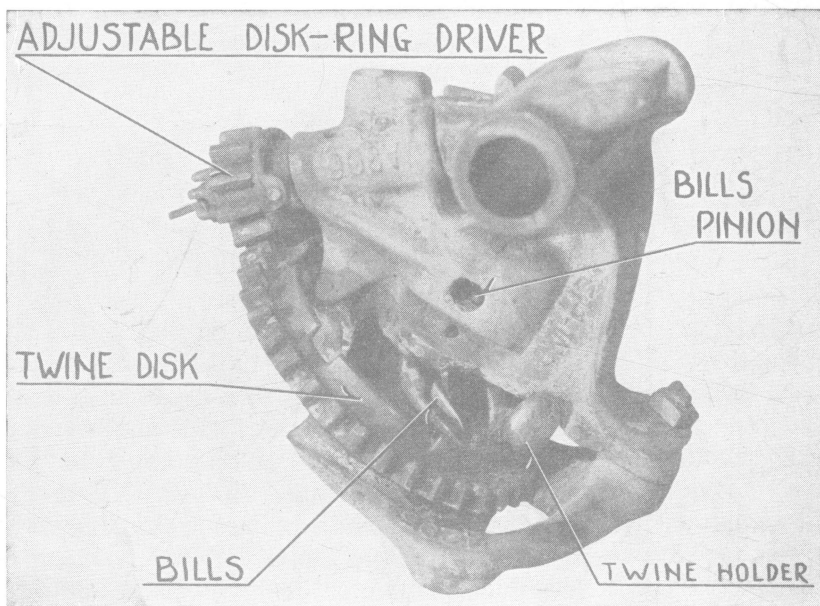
Massey-Harris Knotter Head. View Showing Bills.
